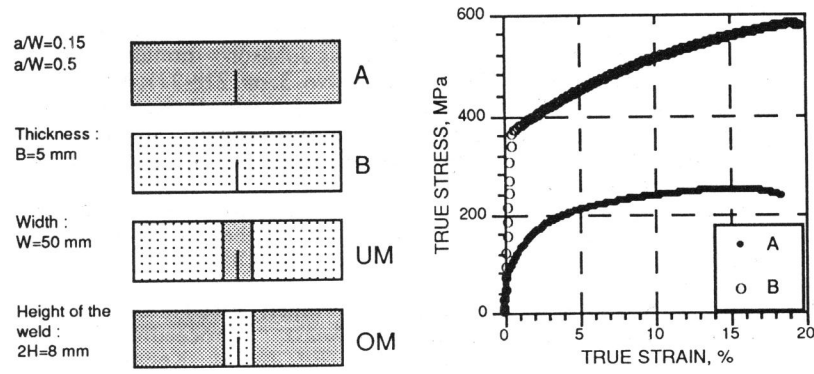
Homogeneous and simulated mis-matched weld SENB specimens. For UM and OM specimens, middle strips which represent welds were electron beam welded.
